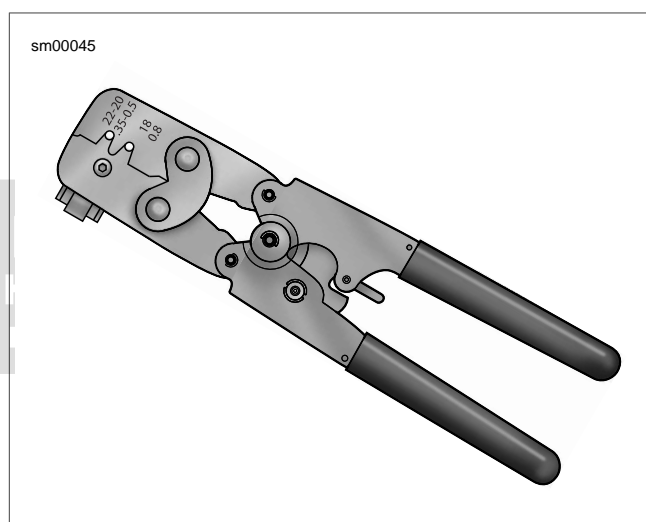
Packard Micro 64 Terminal Crimper (HD-45929)
